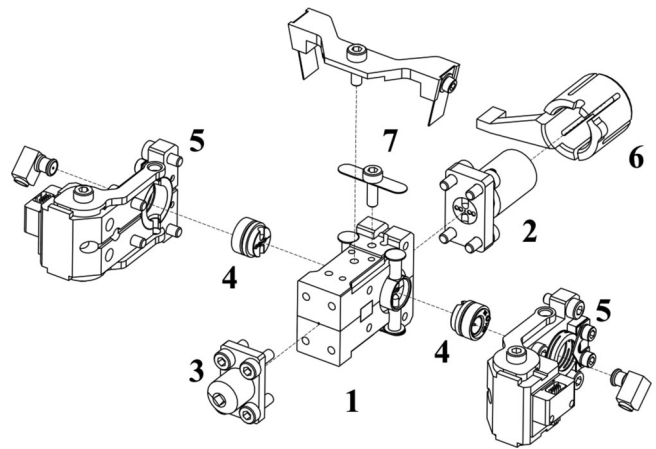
Exploded view of the modular 2SB mixer block. The major parts are: “1”—a central split block (hybrid block) containing the RF waveguide structure including the loads; “2”—a corrugated RF input horn; “3”—a diagonal LO horn; “4”—two backpieces, holding one SIS device each; “5”—two side-pieces, each containing a magnet coil, most of the magnetic field conductors, heater contact, thermometer, a small PCB with a nano-D connector to export all signals and spring-loaded retainer caps to clamp the backpieces in place; “6”—a “collet” to clamp the mixer by its horn in the optics assembly; “7”—brackets to secure connectors magnet pins and GPO connectors. Two right angle GPO connectors in right-bottom and left-top corners show the way the IF cables are connected to the mixer block.
